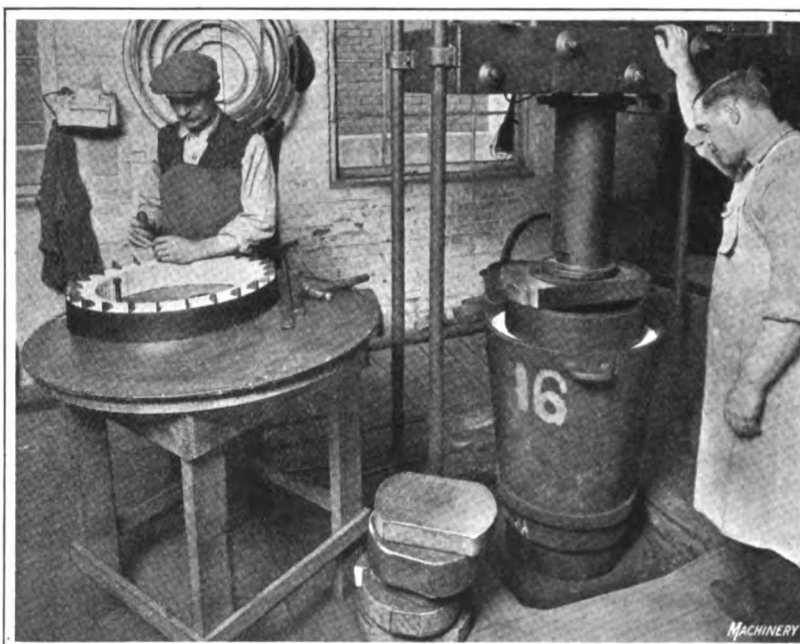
Assembling the Blocks of Canvas into a Ring preparatory to compressing them with the Equipment shown at the Right
